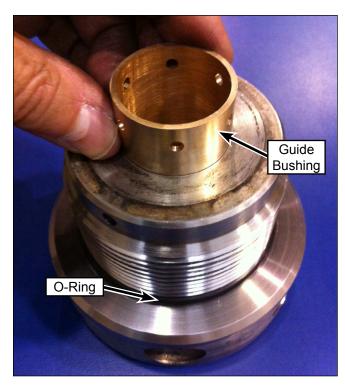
Guide Bushing Removal (15K/20K Gland Nuts).
